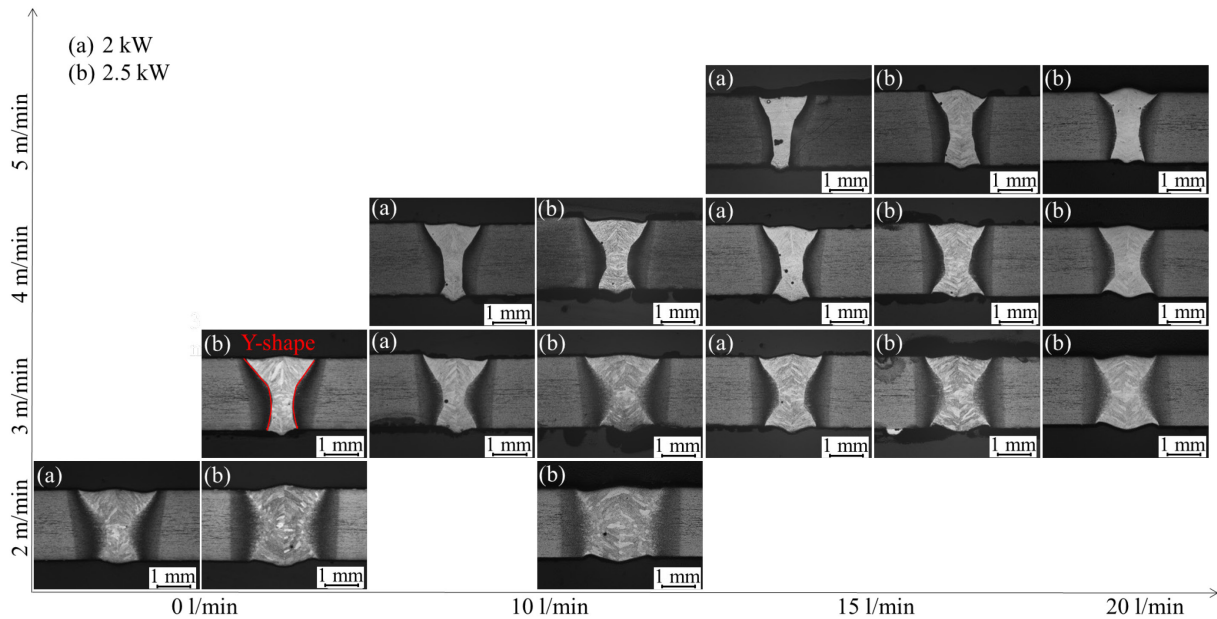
Cross-sections of (a) 2 kW and (b) 2.5 kW with different welding speeds and cross-jet flow rates.
